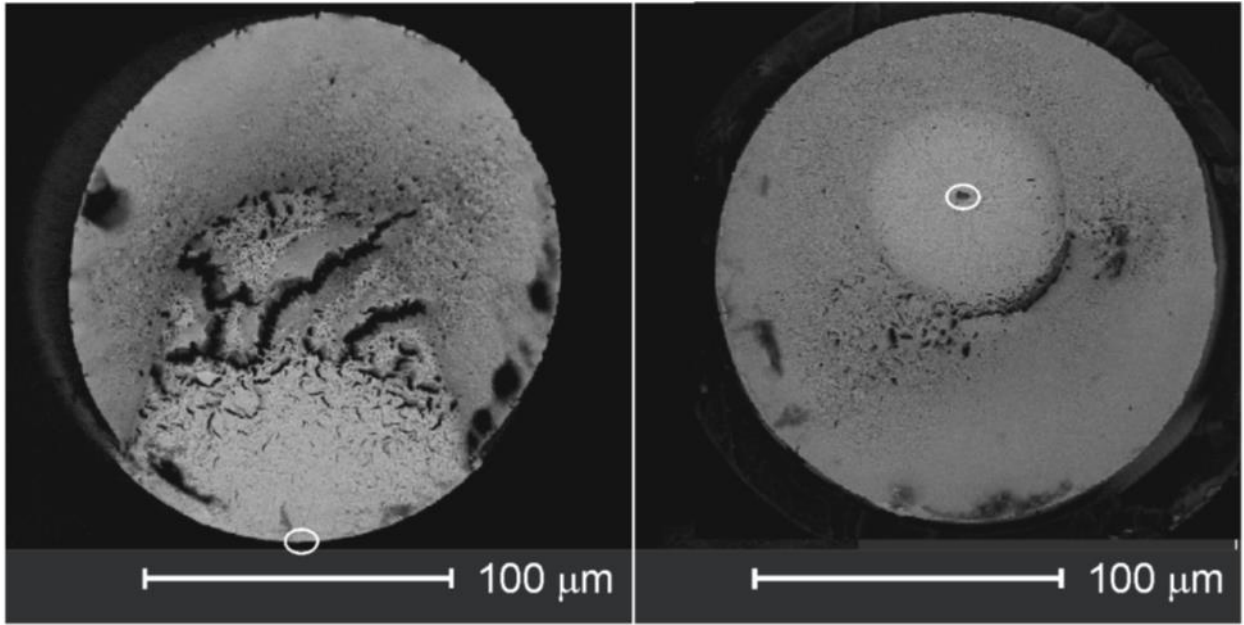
Fatigue Cracking in Heavily Drawn Steel Wires [ref. 9]
